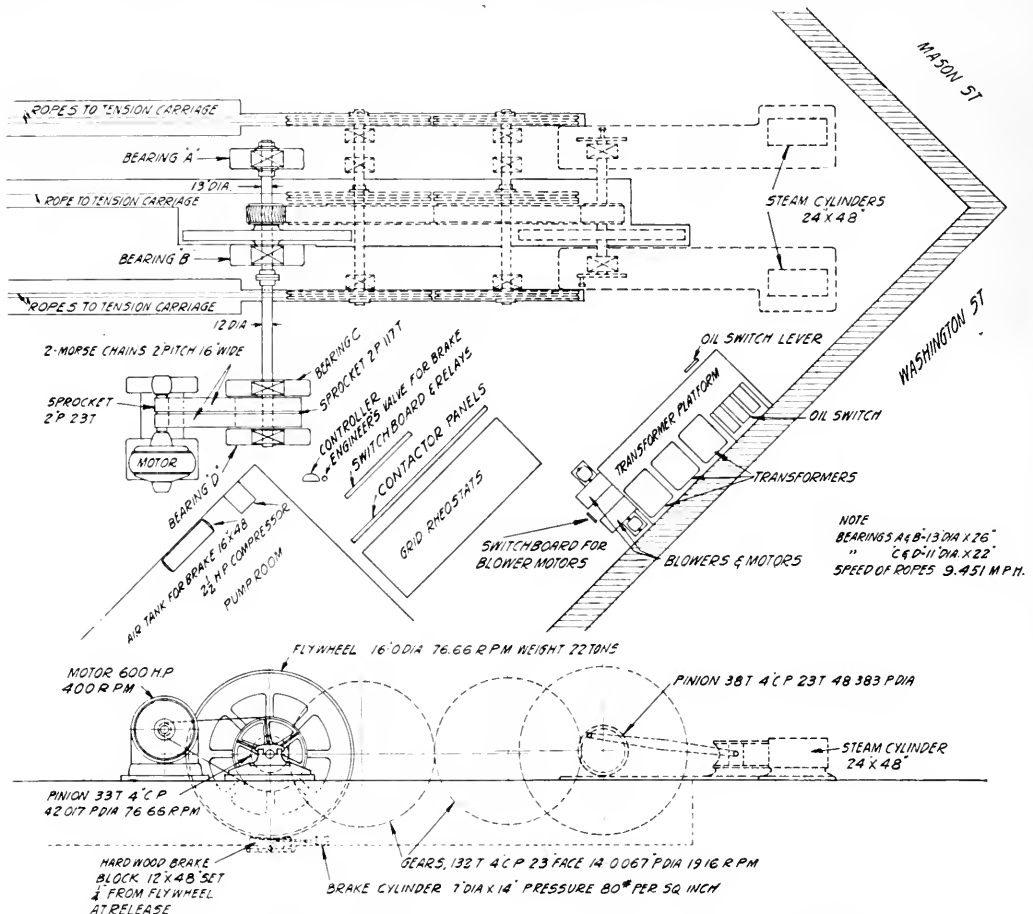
Floor Plan and Elevation of Washington and Mason Street Power House. Dotted Lines Show Old Work. Solid Lines Show New Work Required by Motor Drive.
